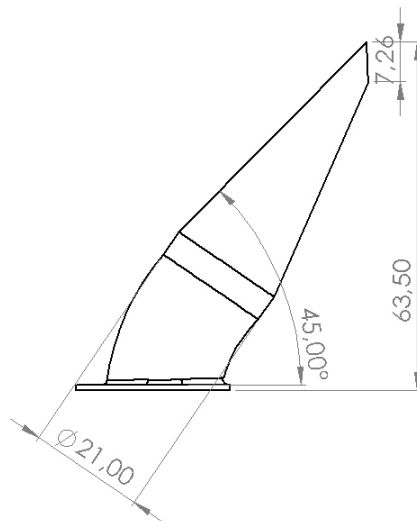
Side view drawing of the tip. Dimensions in micrometres [μm].
